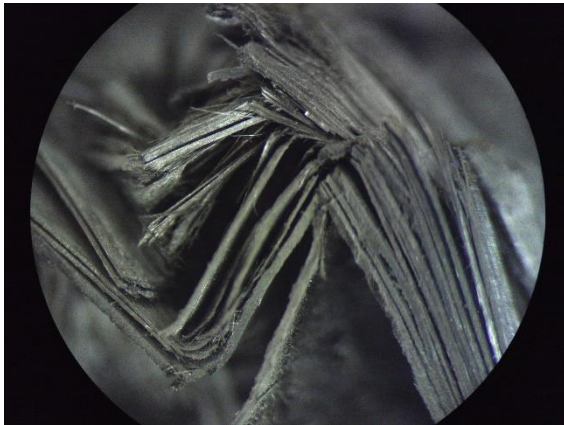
7 deg. loaded specimen. Detail of the inwards bended lamina bundles.
